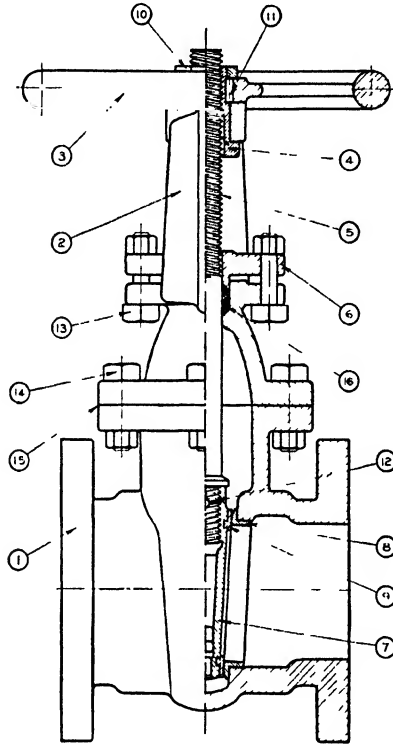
SECTIONAL VIEW OF GATE VALVE ASSEMBLY — A HALF SECTION
